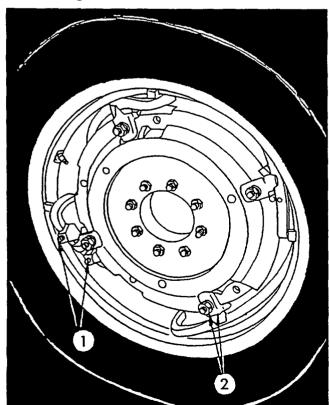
Power Adjust Wheels 1. Wheel Stop; 2. Rail & Clamp Bolt
